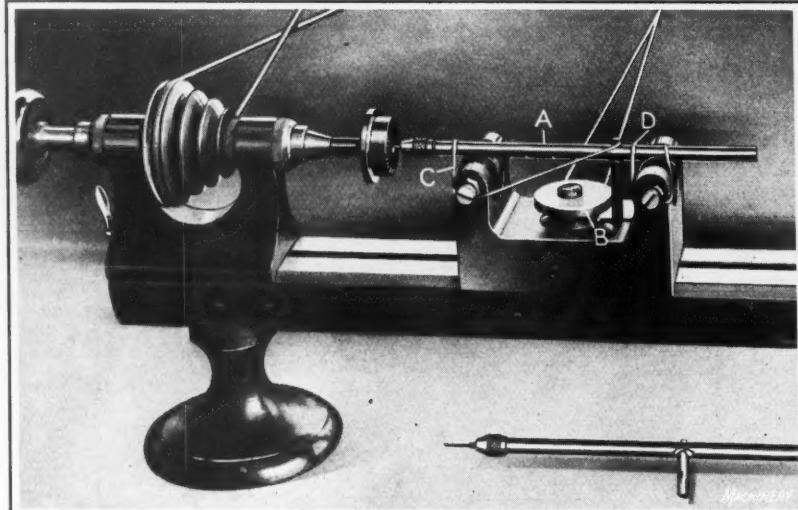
Set-up of Bench Lathe used in lapping the Drawing Hole in the Diamond
